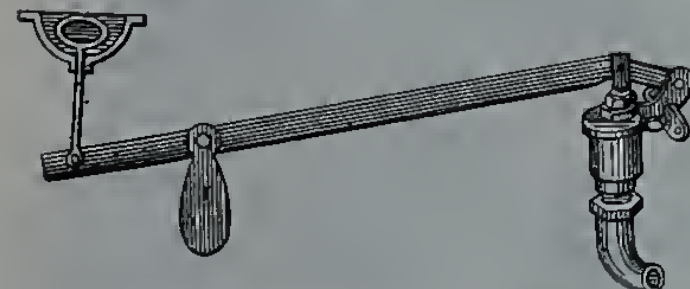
External view of arrangement with Valve, Fig. 318.
